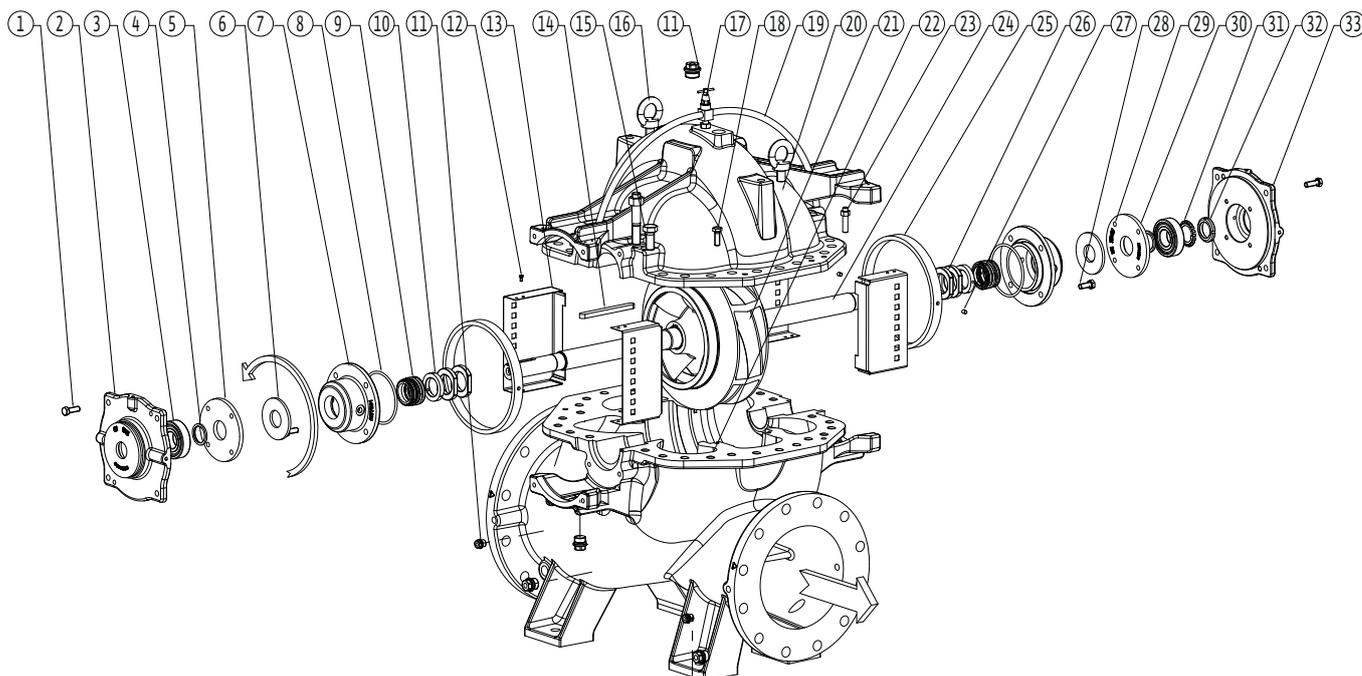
Exploded view of Atmos TERA-SCH hydraulic (mechanical seal version without sleeves)
